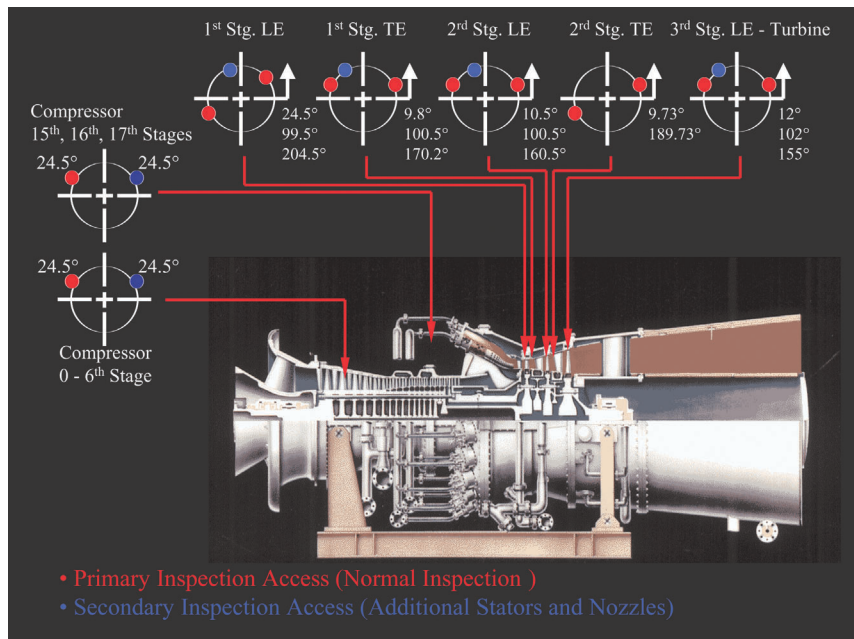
Borescope inspection access locations for 6F machines
